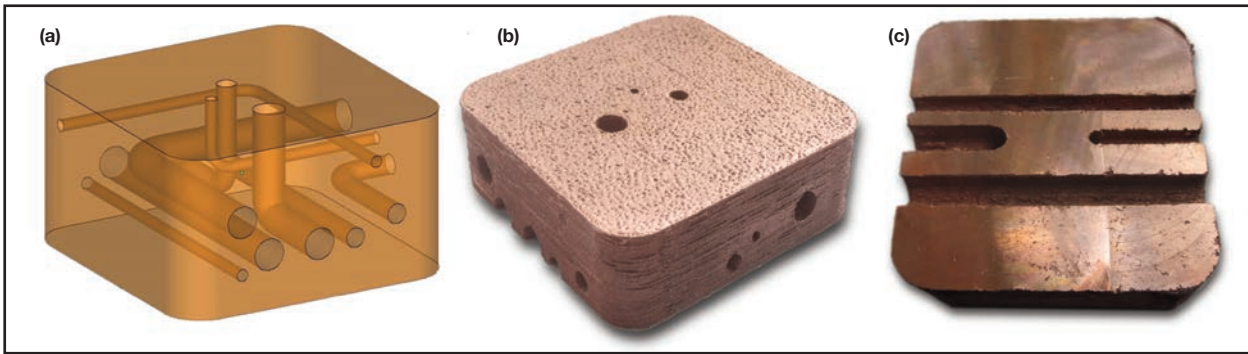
3D CAD model of the cooling channel test block shows internal cooling channel geometry (a); photographs of the sectioned EBM-fabricated test blocks show cooling channels of 1.5, 4, and 7 mm in diameter (b and c).
